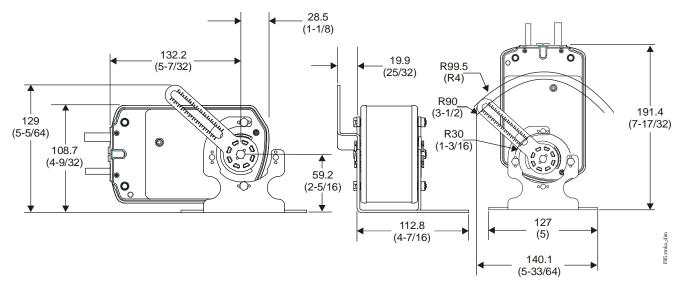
M9208-250 Remote Mounting Kit Overall Dimensions, mm (in.)
